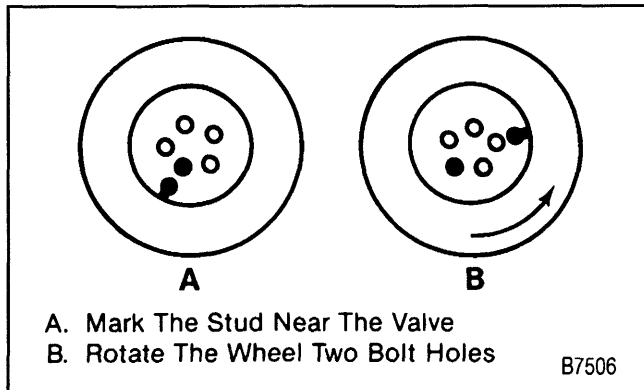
Tire and Wheel Assembly to Hub/Rotor Vectoring
